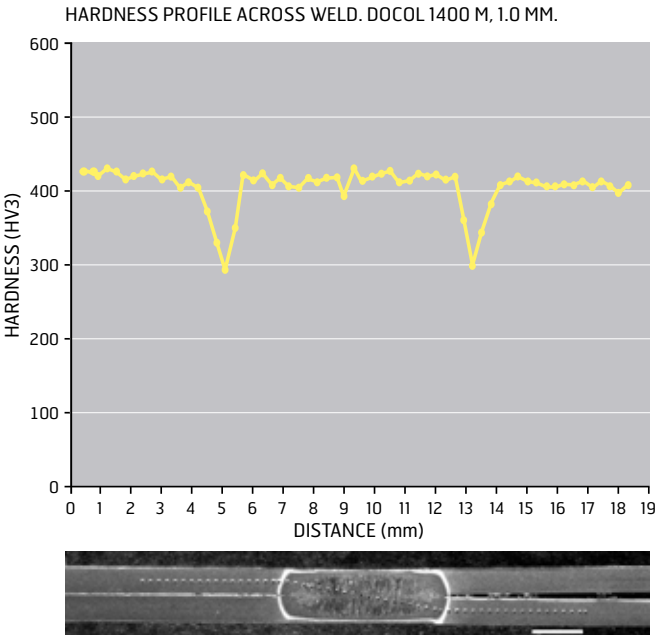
Cross section and hardness profile across spot weld for Docol 1400 M (sheet thickness 1.0 mm) spot welded to itself. Welding data: Cap type B 16/6, electrode force 3.5 kN, welding time 220 ms, hold time 120 ms.
